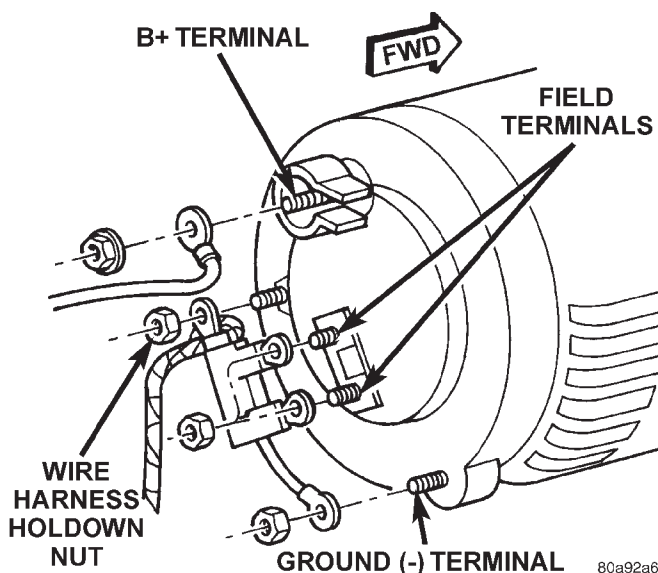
Remove/Install Generator—4.0L Engine—LHD
